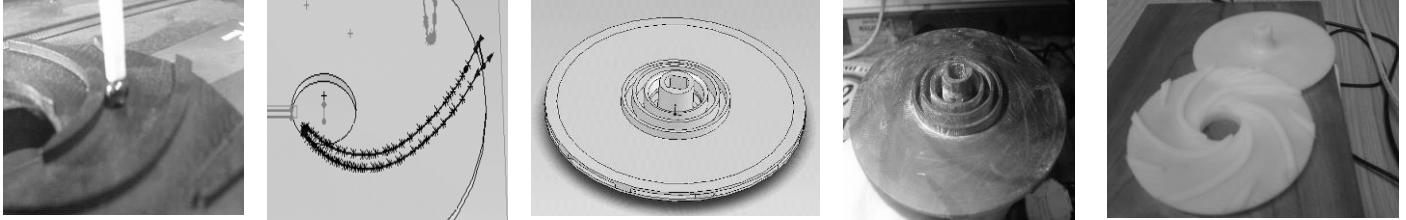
Reverse Engineering, Digitising, 3D CAD, RP Impeller, CNC machined
